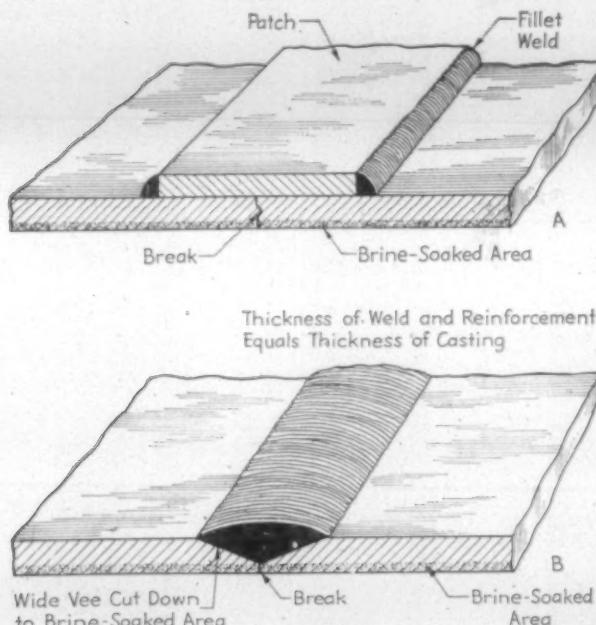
Breaks in brine-soaked castings are best repaired by welding a patch onto the unaffected side of the casting (A) or by using a wide 'V' and strongly reinforcing the weld (B).
